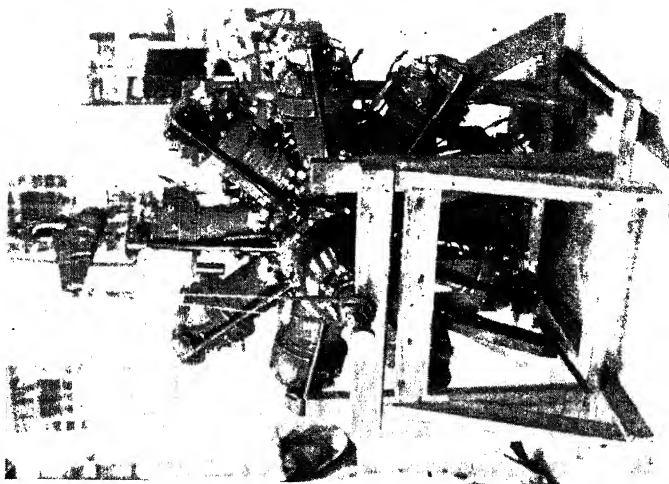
CARE MUST BE TAKEN WHEN SLINGING THE ENGINE.
